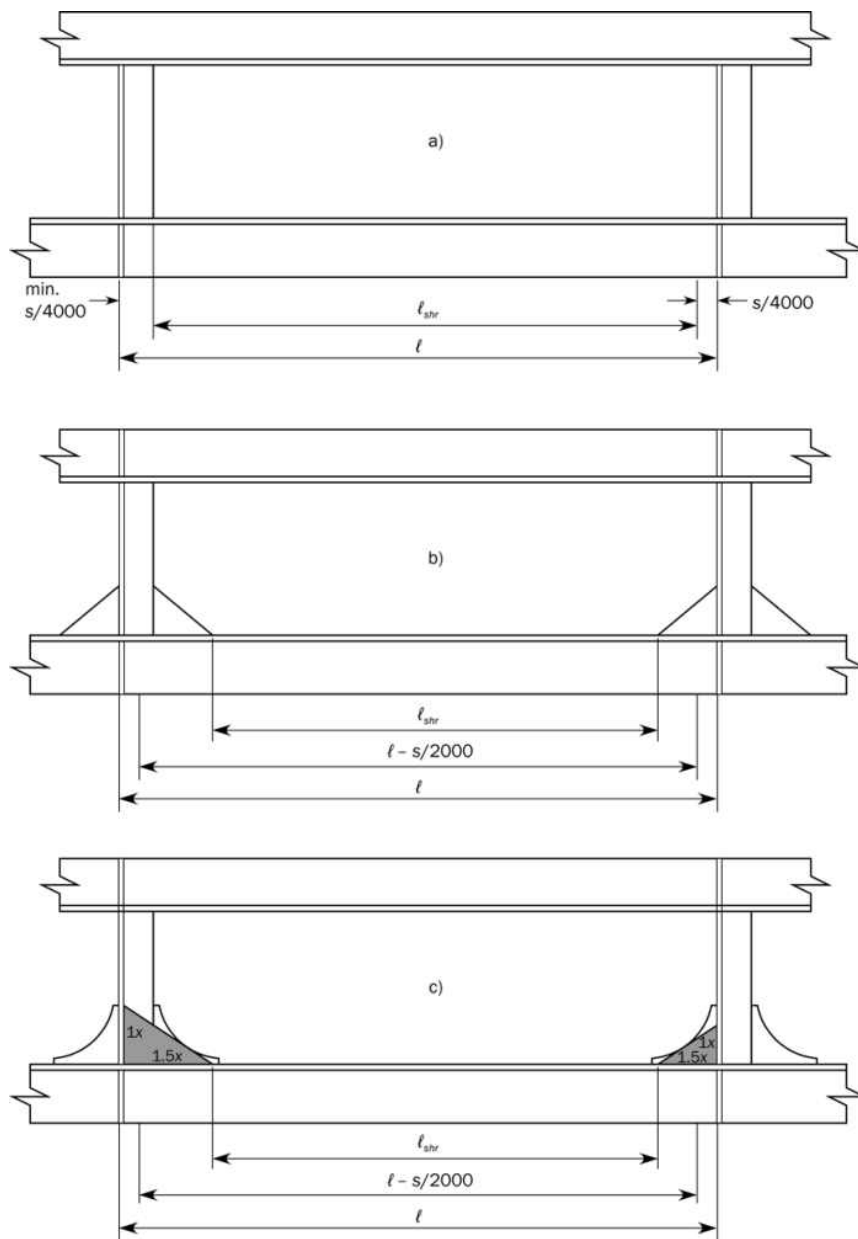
Effective shear span of stiffeners supported by web stiffeners (double skin construction)
